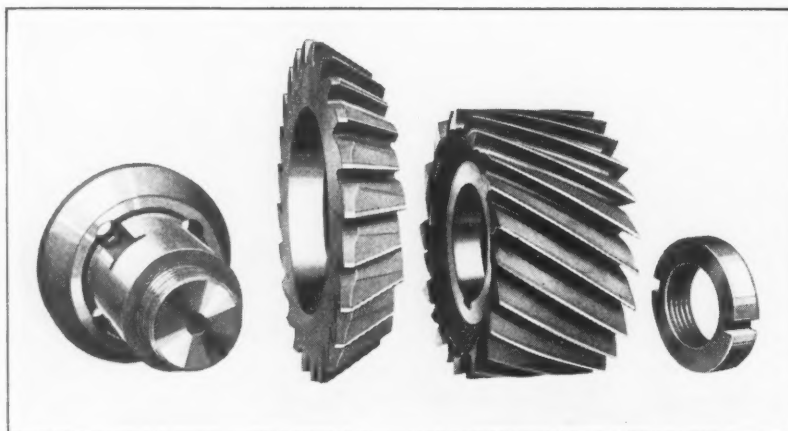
Construction Details of the Built-up Opposed-spiral Cutter Shown in Fig. 8
